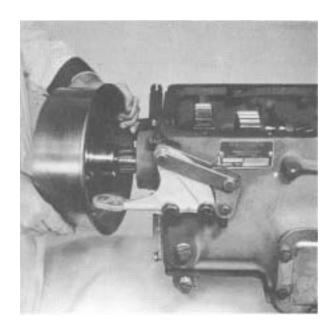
Install drum and flange assembly, brake locating bracket, and anchor support bar.
